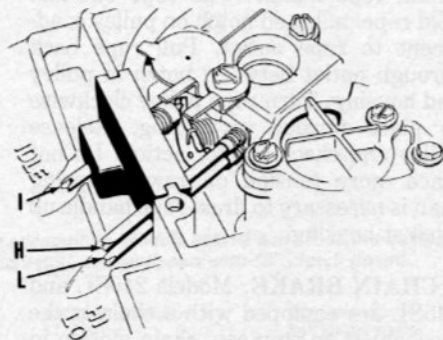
View showing location of idle speed screw (I), low speed mixture screw (L) and high speed mixture screw (H).
